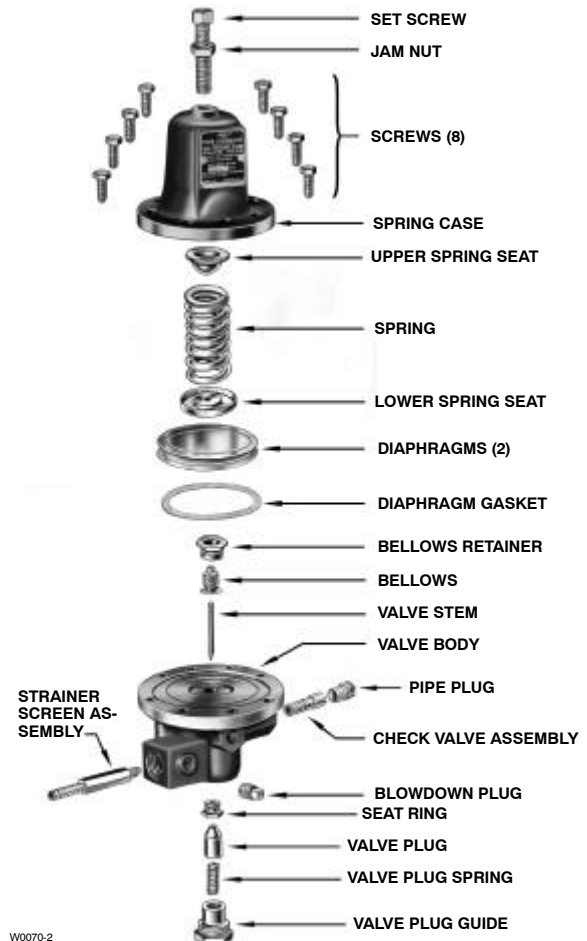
Exploded View of Type 92B High Pressure Pilot Valve
